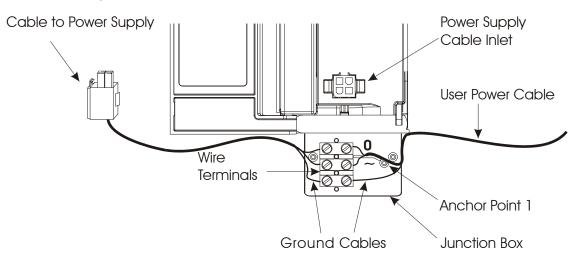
RTU Power and Ground Connections - No I/O Frame Installation
